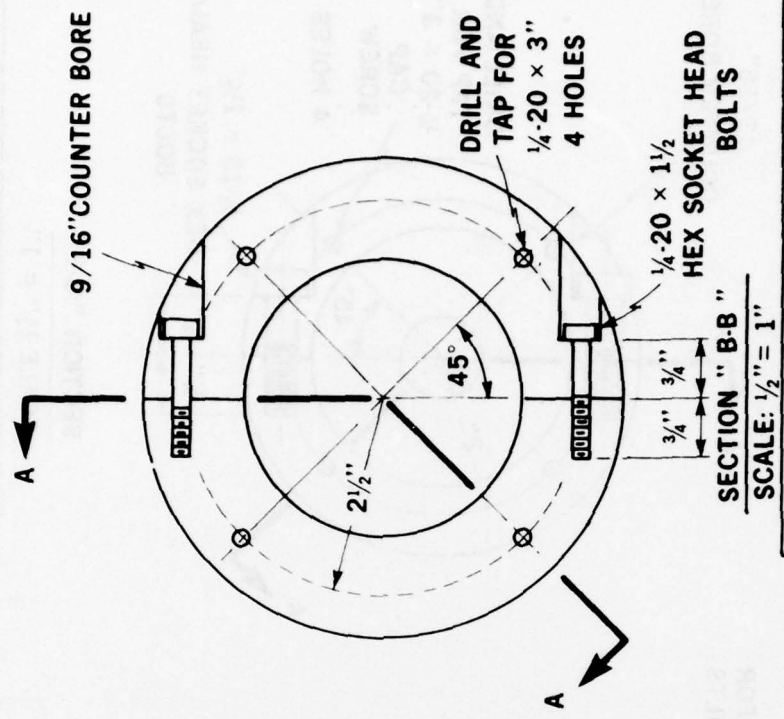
DESIGN DRAWING OF THE 2 5/8 IN. DIAMETER
